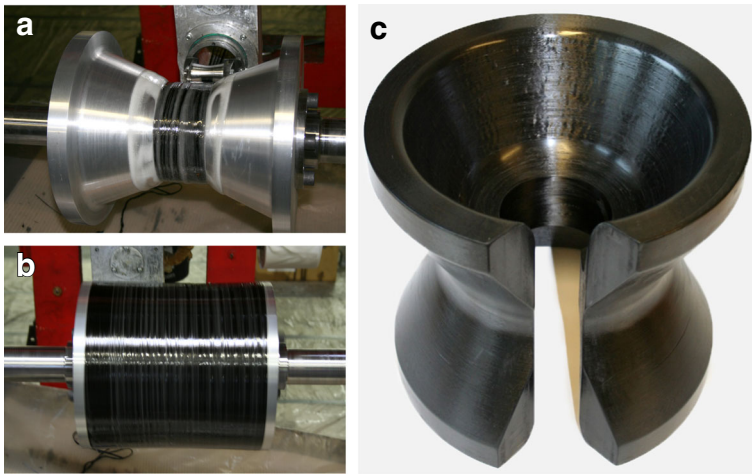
Fabrication of the test specimen: a aluminum mandrel; b finished winding operation; c turned and milled specimen
